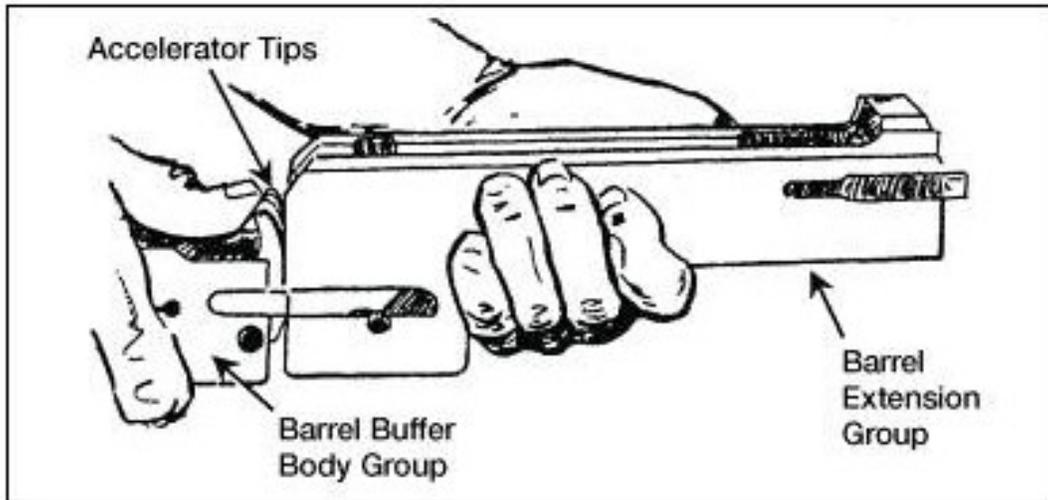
ST-1025_17 (Separation of the barrel buffer and barrel extension assemblies)
